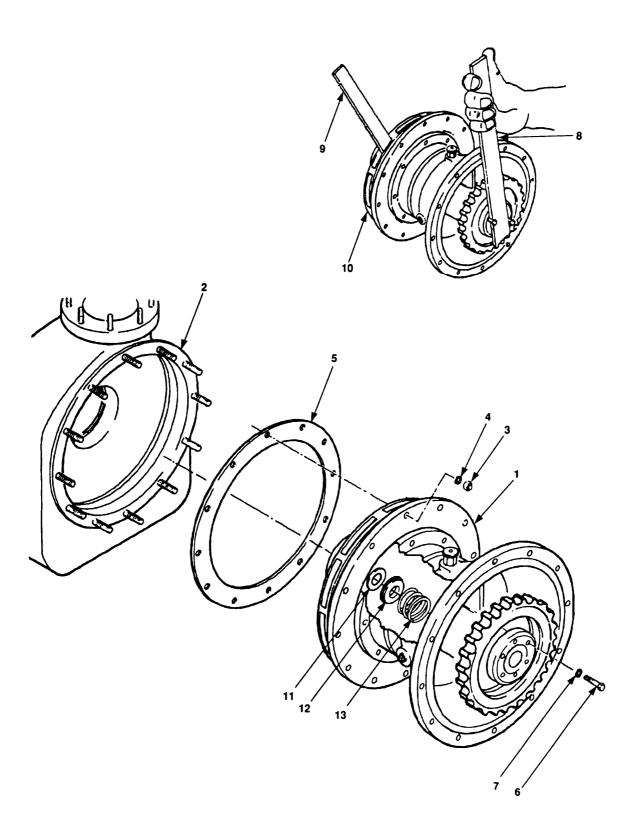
Impeller Maintenance. (Sheet 1 of 2)
